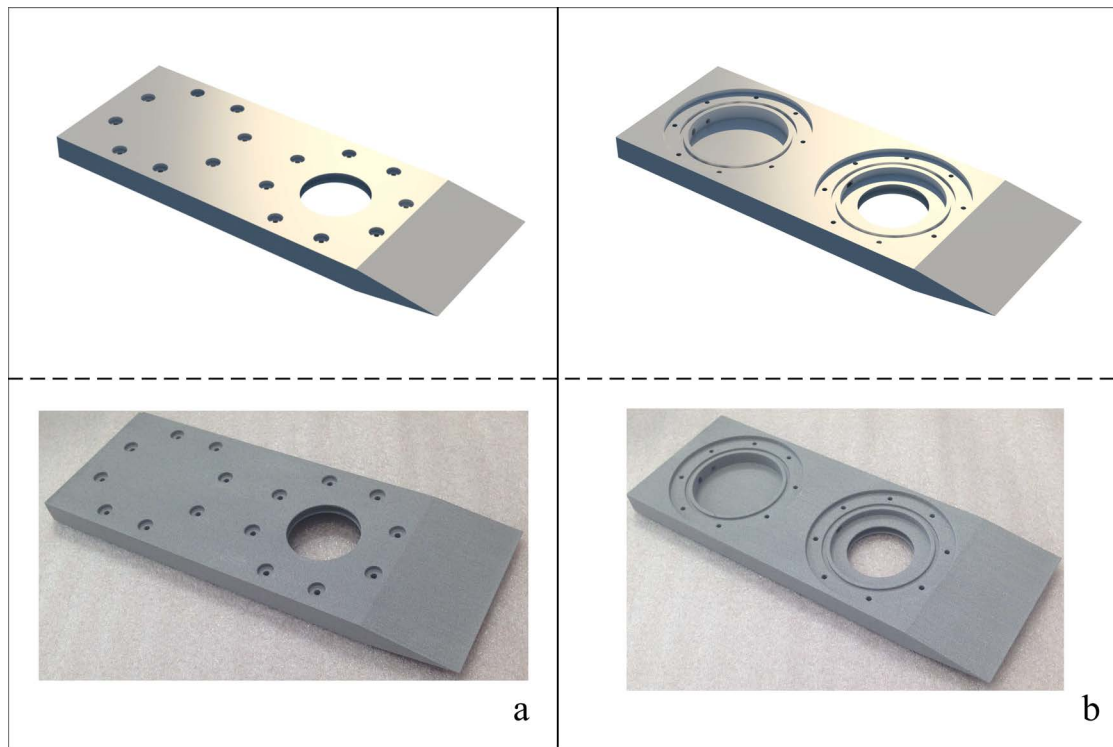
3D printed DMT blade body in the top view(right) and the bottom view(left)
